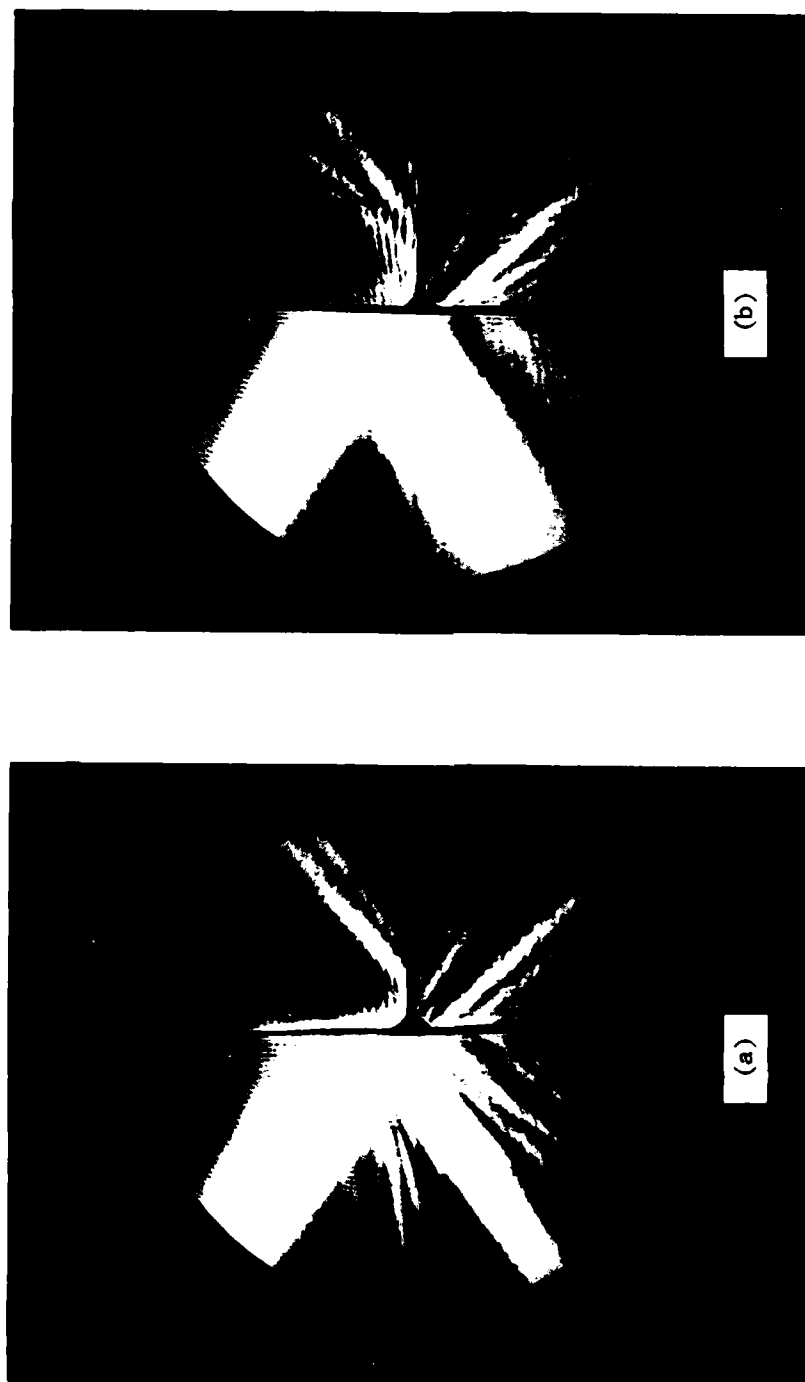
Acoustic beam incident on a 0.056 in. thick 304-stainless steel plate at an angle of 31.5°. The A<sub>0</sub> Lamb wave is excited. (a) Welded Plate. (b) Machined Plate.
